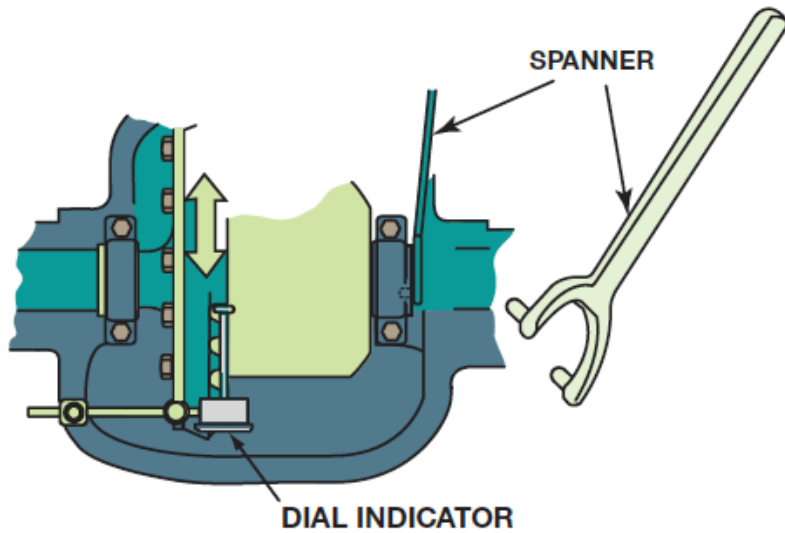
Threaded adjusters used to set backlash and carrier preload.
